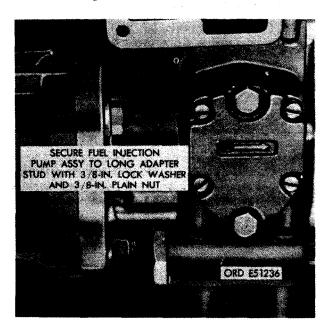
SECURING FUEL INJECTION PUMP ASSEMBLY TO LONG ADAPTER STUD.
